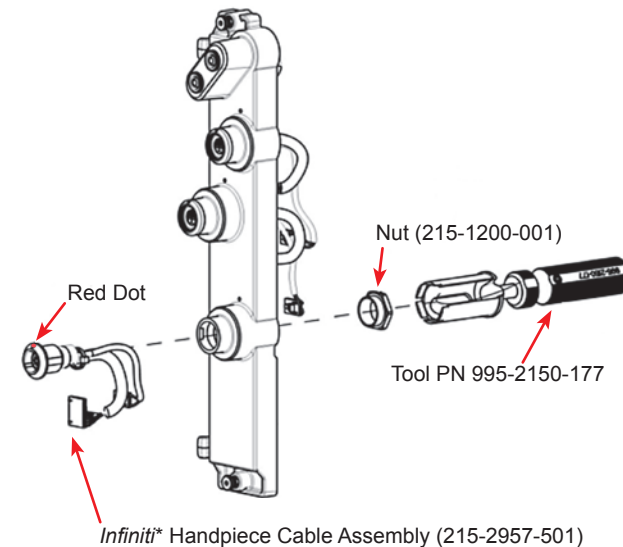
Infiniti Handpiece Cable Assembly Removal
